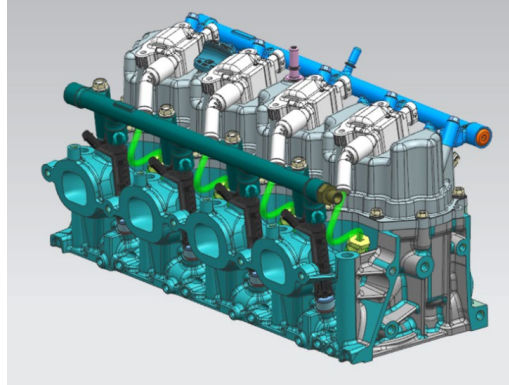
Proposed advanced combustion system cylinder head assembly – exhaust side view.
